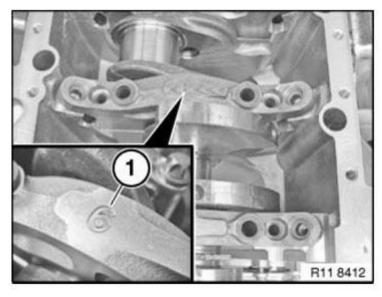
Identifying Main Bearing Cap Number Courtesy of BMW OF NORTH AMERICA, INC.
